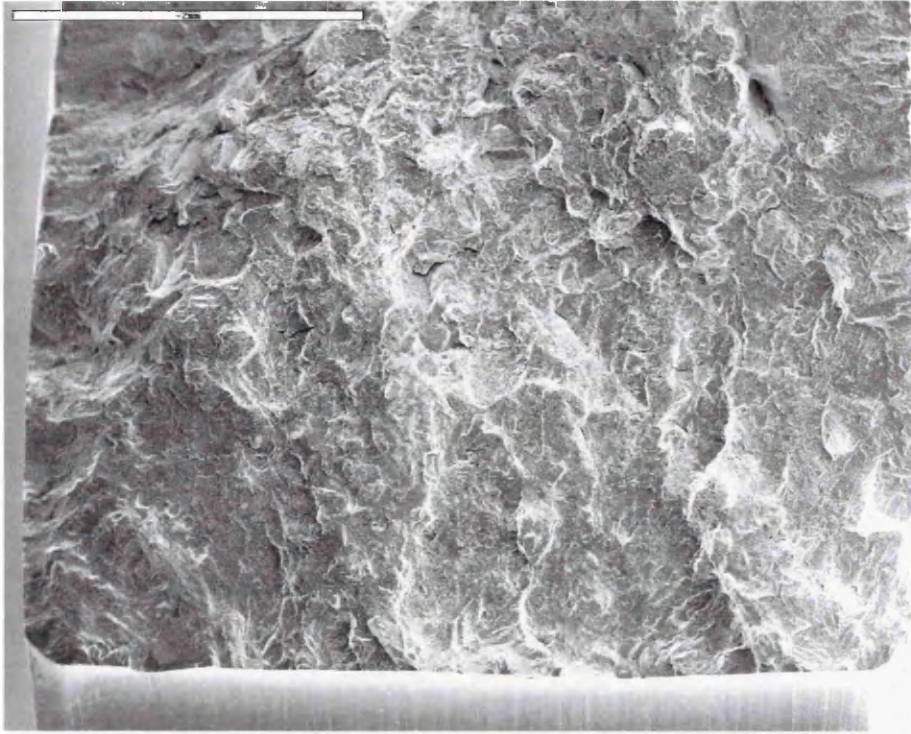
Strain control fracture surface (550°C, 2 min dwell in tension and compression), with fracture originating from surface.
